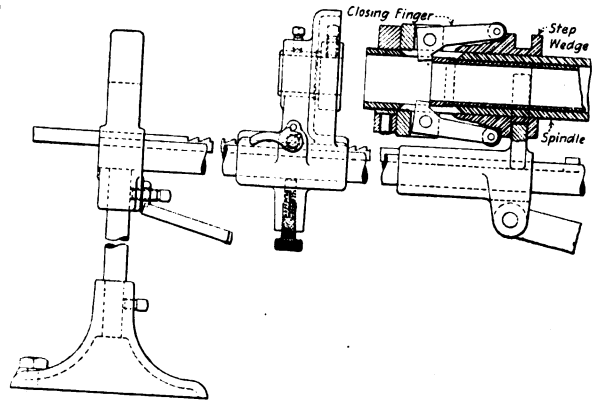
REAR END OF SPINDLE AND BAR-FEED MECHANISM WITH AUTOMATIC CHUCK
